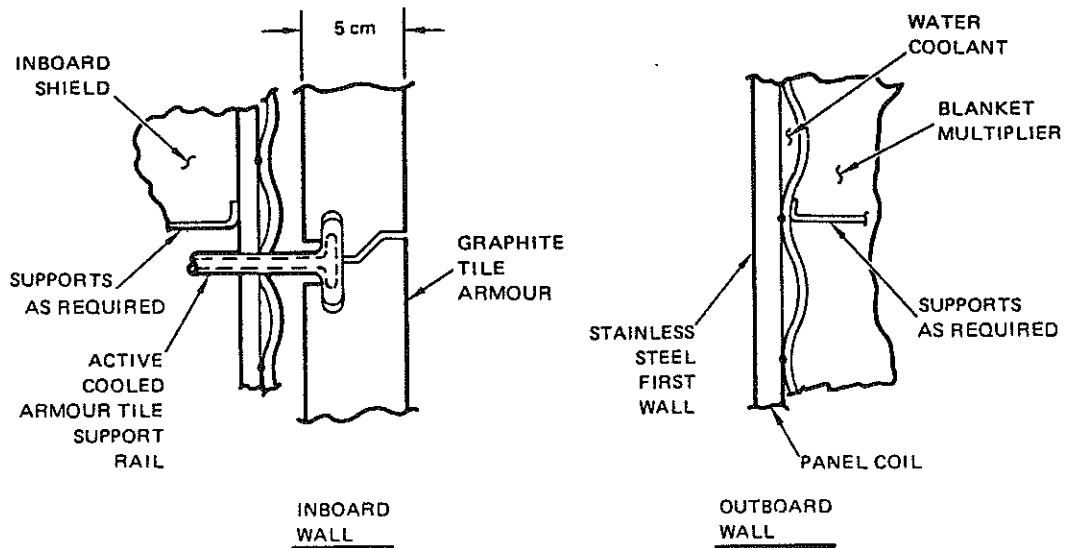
Back-up design: graphite armour inboard wall and bare stainless steel outboard wall.
